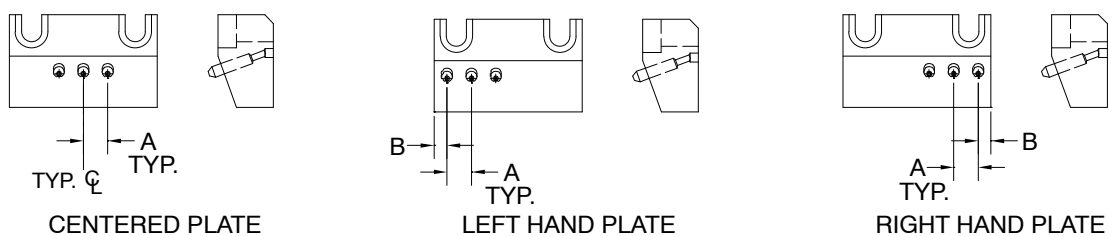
Horizontal Mini-Bead nozzle dimensions
